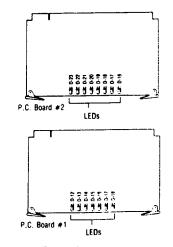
PRINTED CIRCUIT BOARDS AND LEDS.
